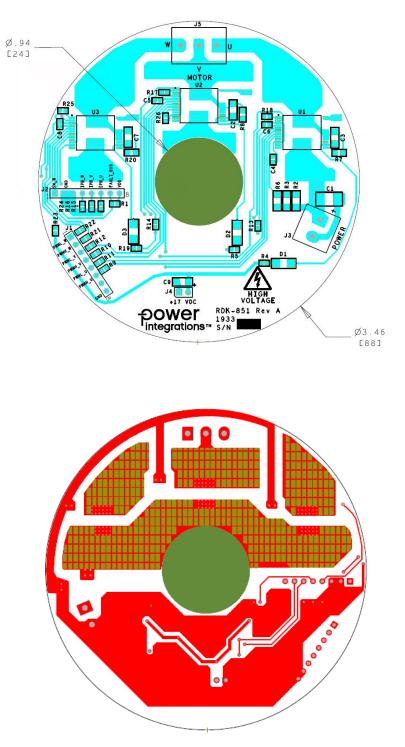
Printed Circuit Board Layout Top and Bottom View.
